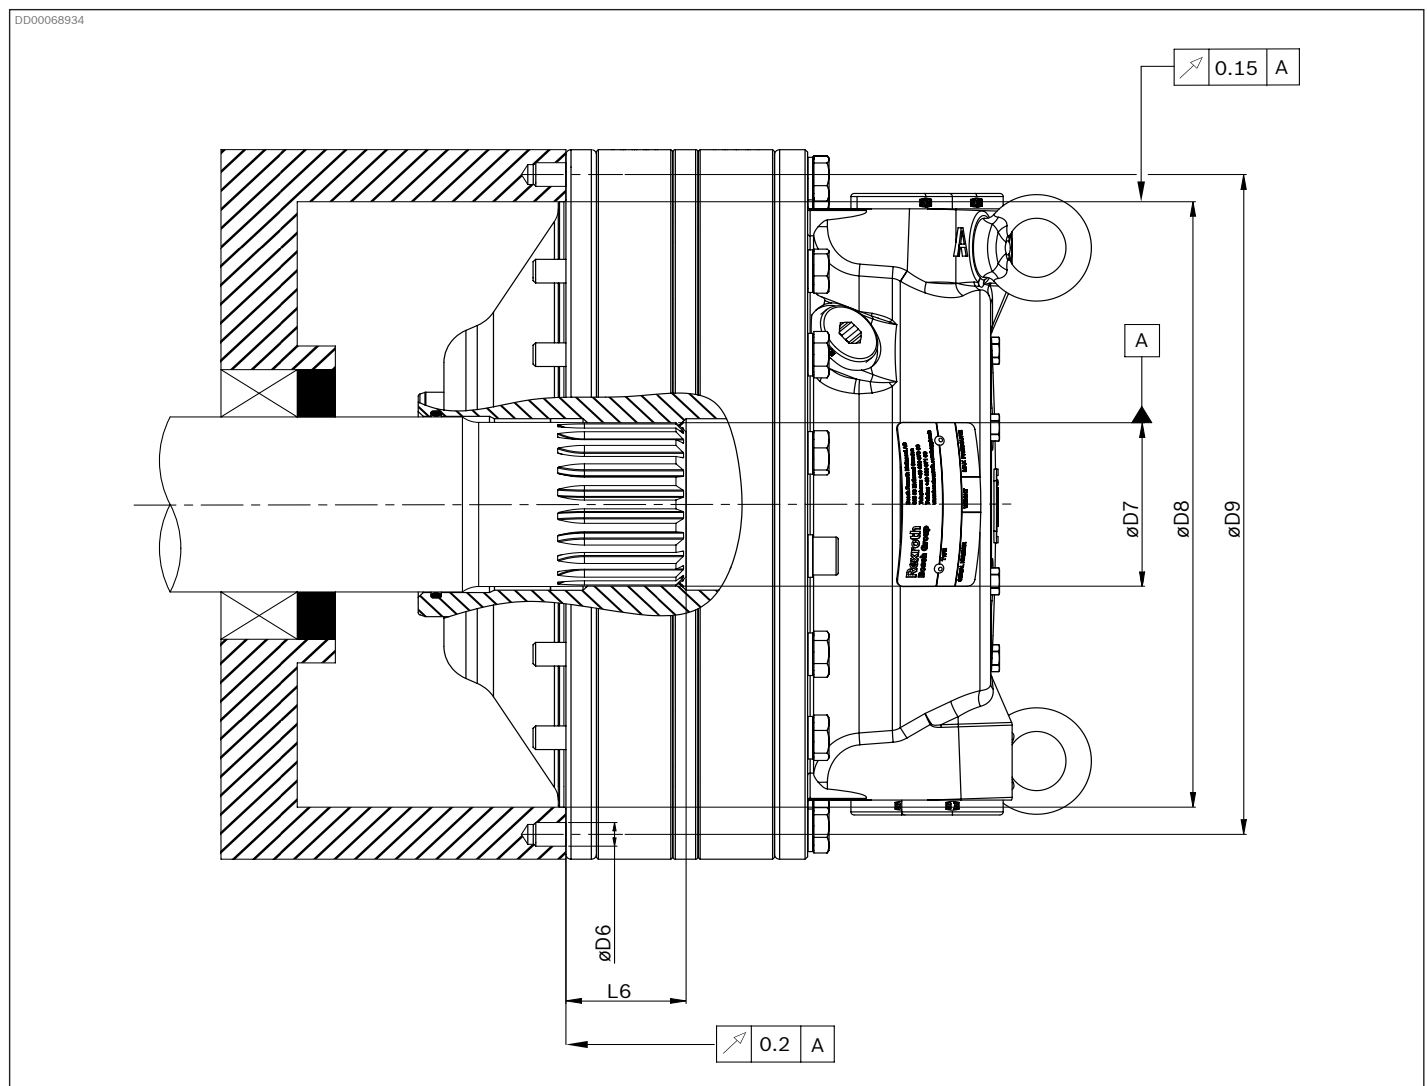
Shaft installation tolerances CAB 10 - CAB 20
